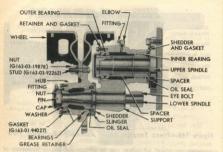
Compensating Wheel, Hub, and Support— Sectional View
